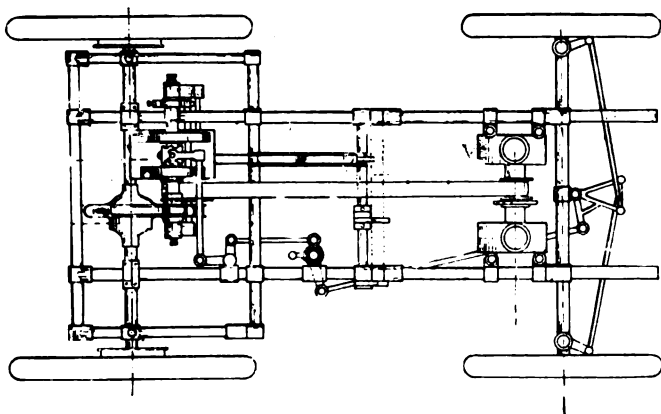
PLAN OF PRINETTI-STUCCHI VOITURETTE.
